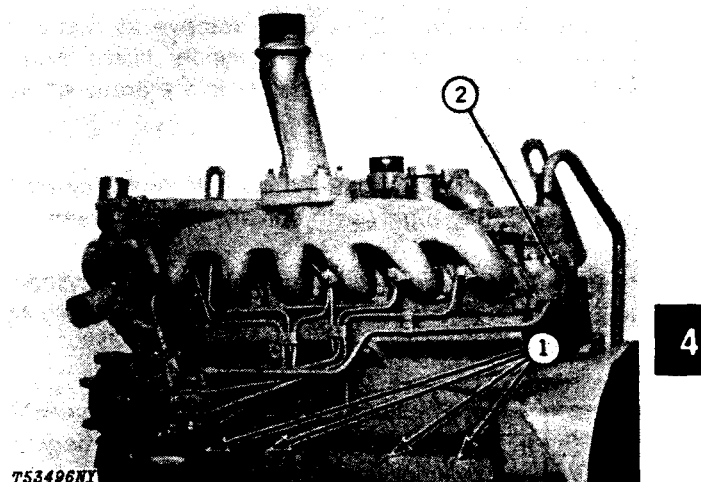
Oil Gallery Plugs and Core Hole Plugs
